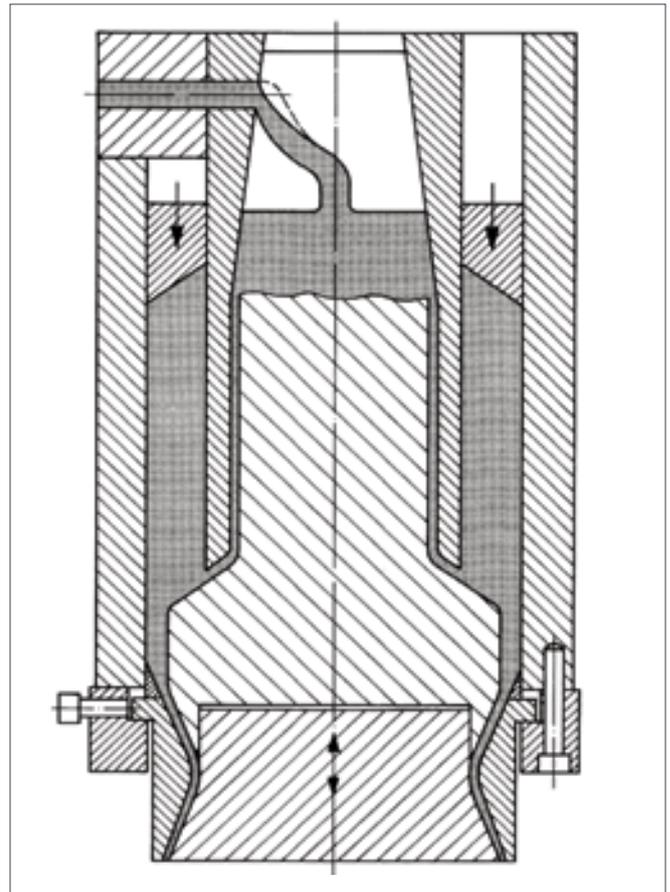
Tubular Plunger Accumulator (older design) (design: Kautex-Werke, Hangelar)
